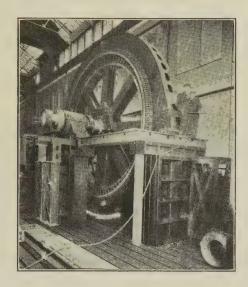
5000-Hp., 82-Rev. Per Min. Synchronous Motor for Steel Mill Drive Assembled for Test
